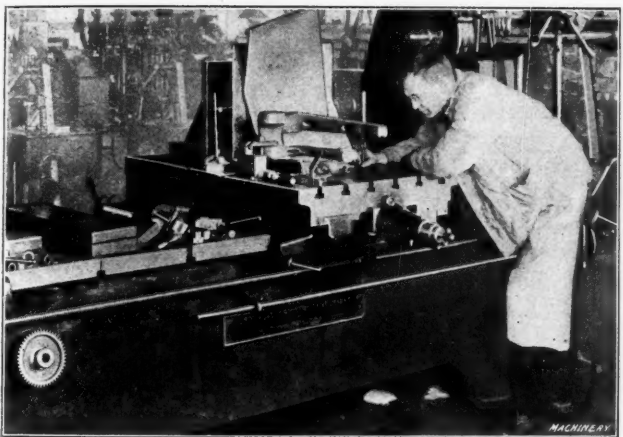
Setting-up and Locating Experimental Work on Boring Machine
